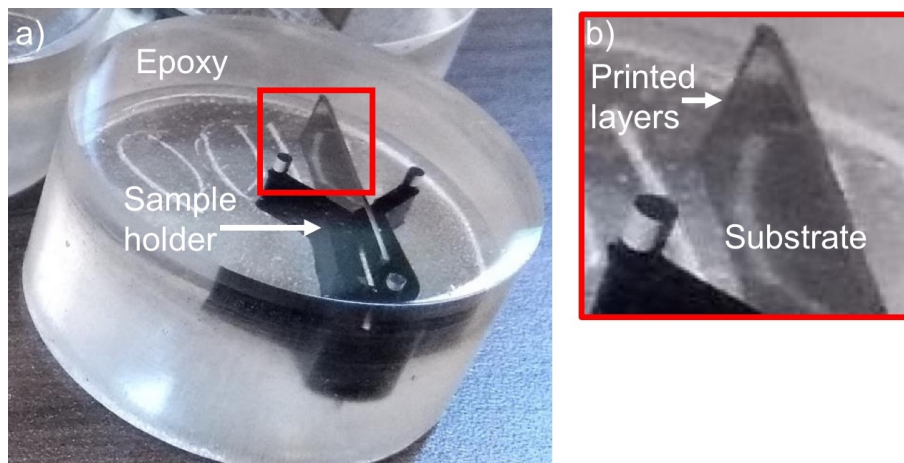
a) Cut sample mounted in epoxy. b) is a close-up of the printed layers in a).
